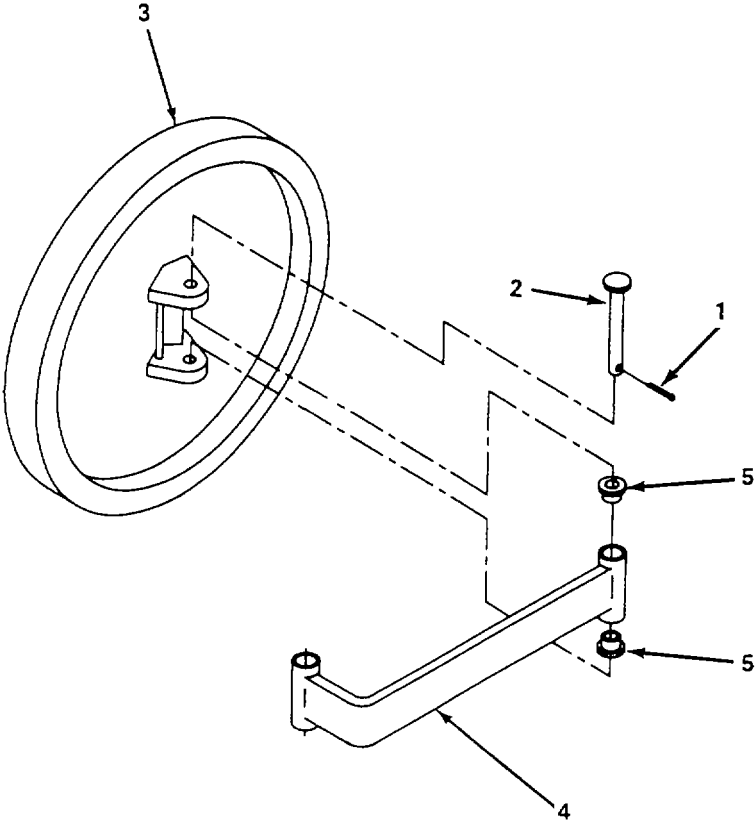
Inner/Outer Lock Door Assembly, Repair.
